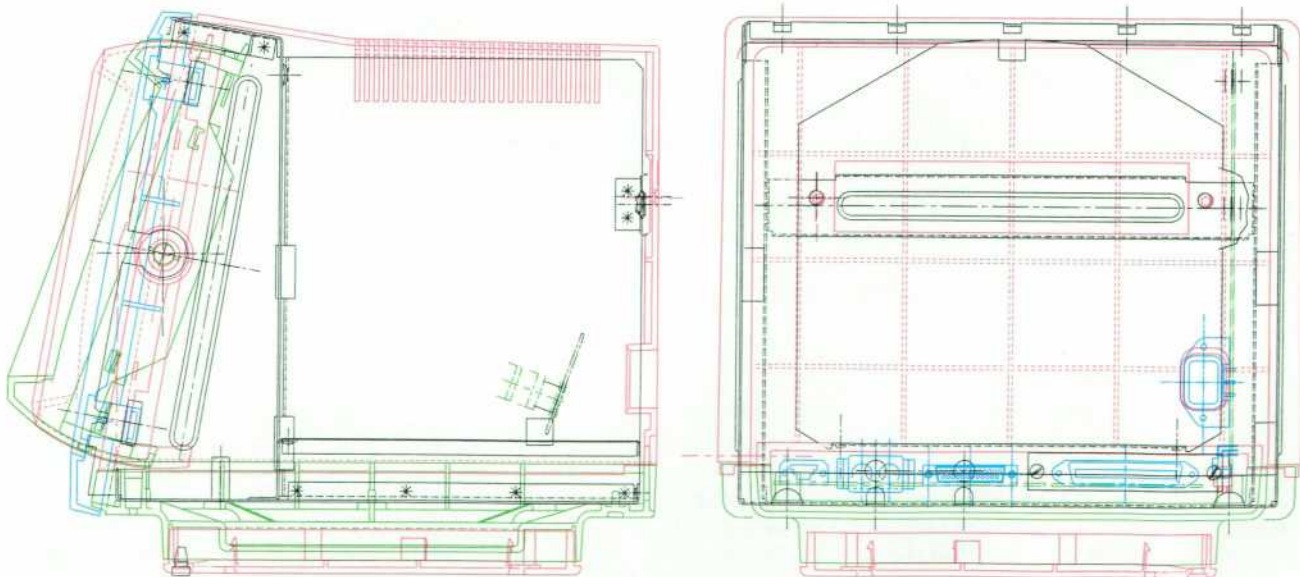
An HP Draft drawing of the HP 2392A CRT tilt mechanism.
